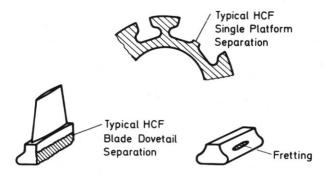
Blade Dovetail Fretting and Typical HCF Failure
